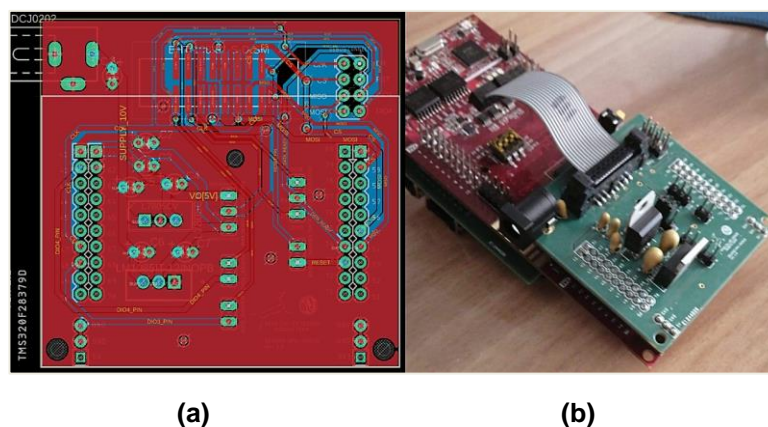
(a) Custom PCB design overview. (b) Assembled boards.
